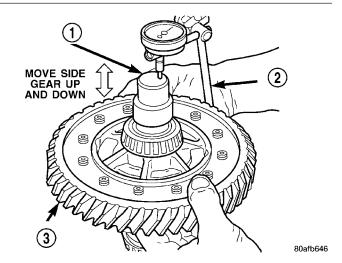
Checking Side Gear End Play (Ring Gear Side)
